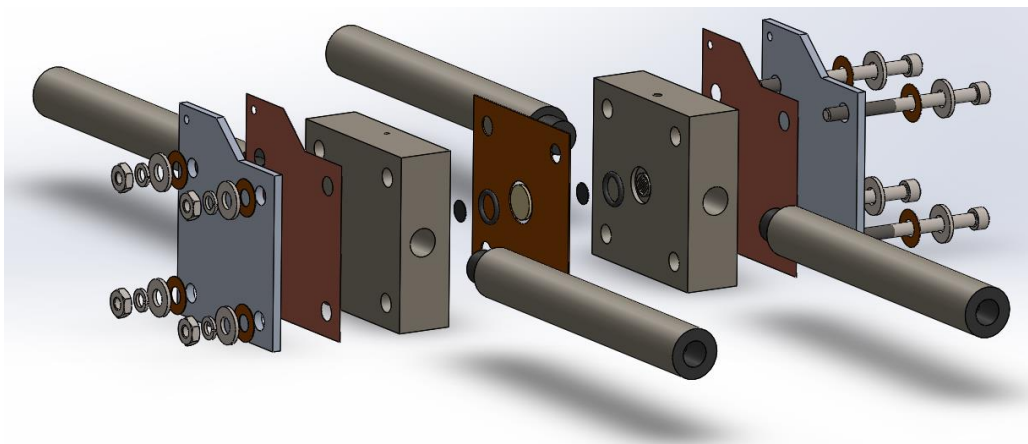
Exploded view of the reactor assembly. Designed in SolidWorks.
